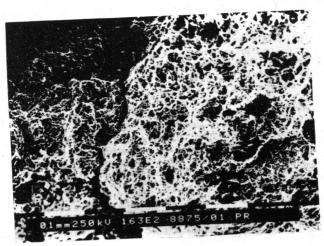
Secondary cracks in the middle of the sample. Ductile fracture.
